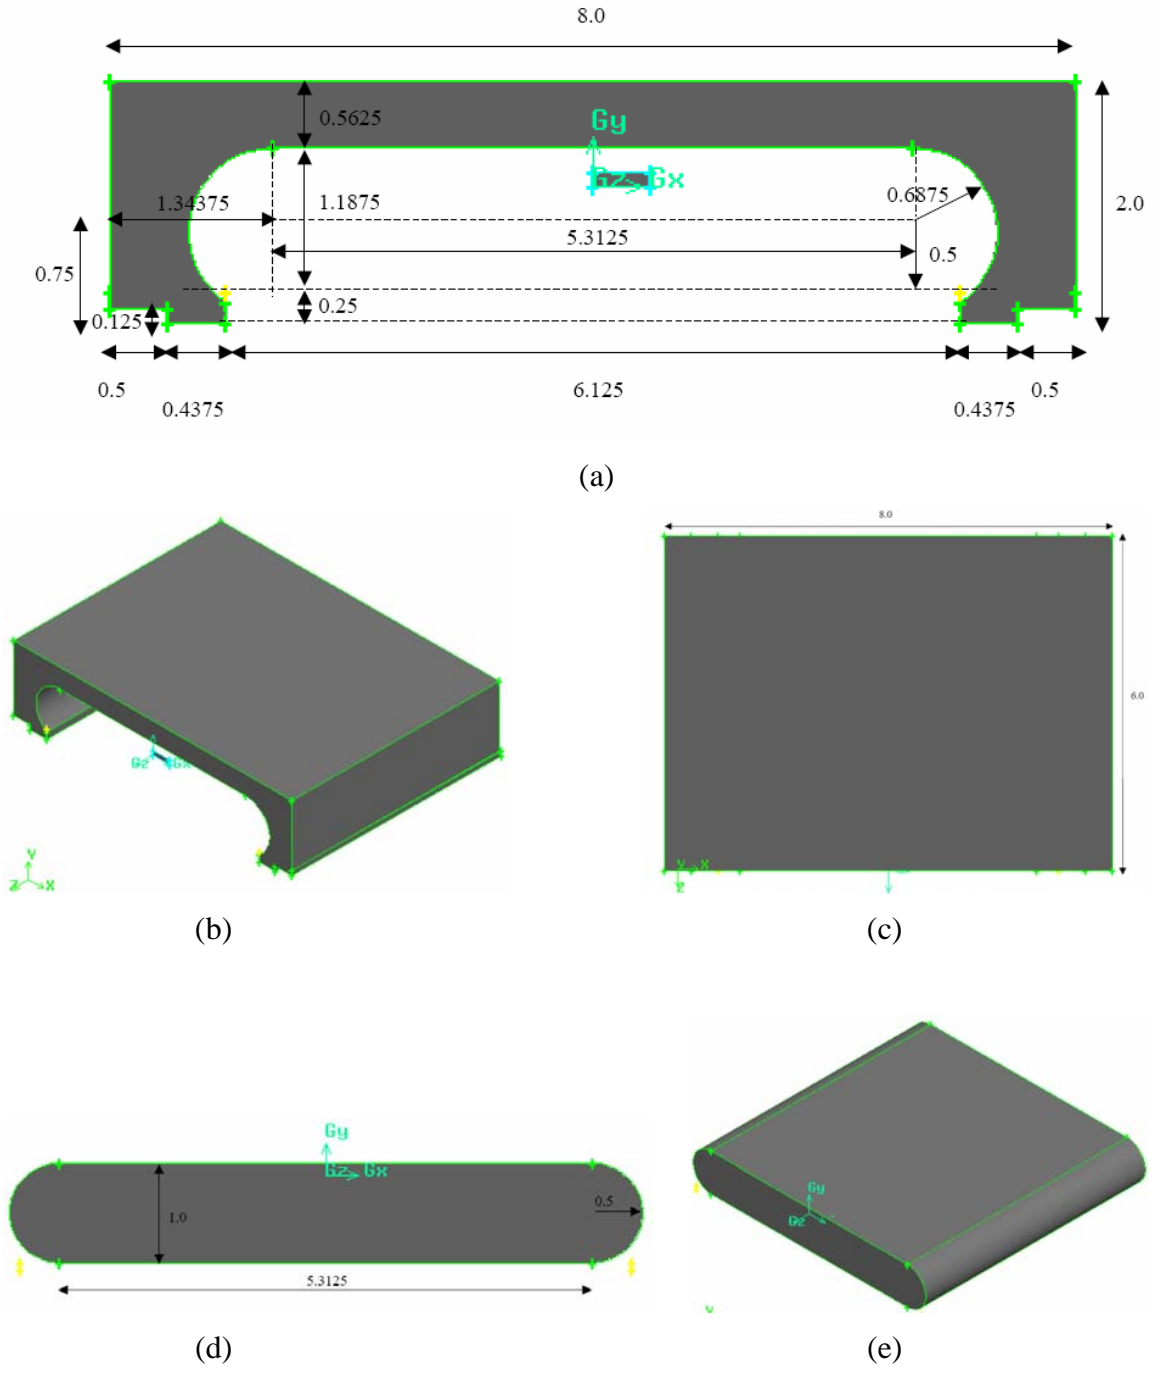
Design for Actuator 3; (a) front view of the outer channel, (b) isometric view of the outer channel, and (c) top view of the outer channel, (d) front view of the un-machined inner mandrel, and (e) isometric view of the un-machined inner mandrel. All dimensions in inches.
